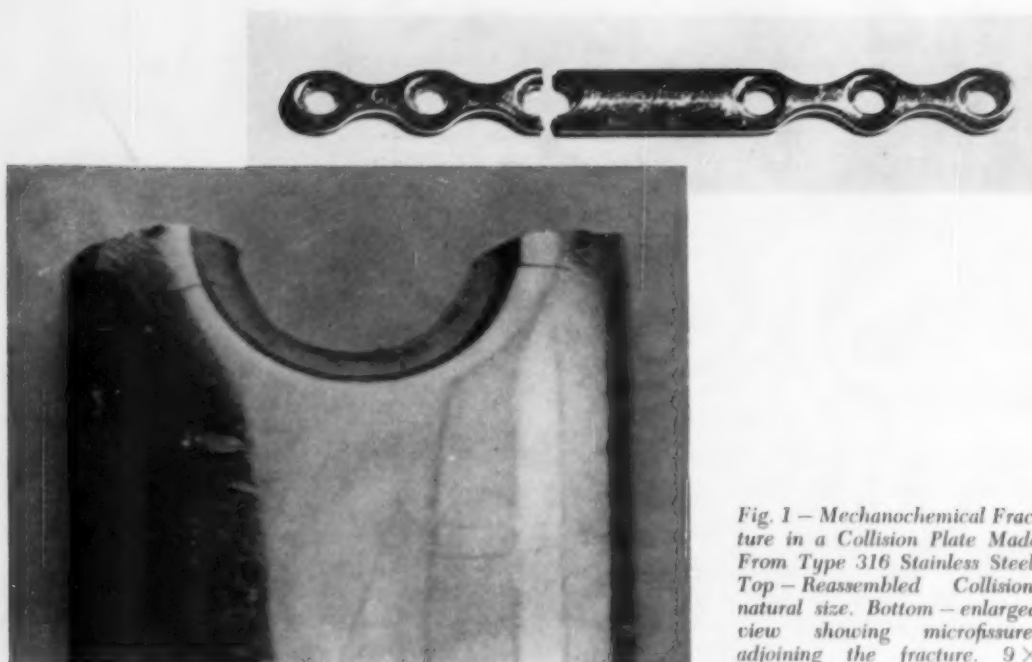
Mechanochemical Fracture in a Collision Plate Made From Type 316 Stainless Steel. Top — Reassembled Collision; natural size. Bottom — enlarged view showing microfissures adjoining the fracture. 9X
